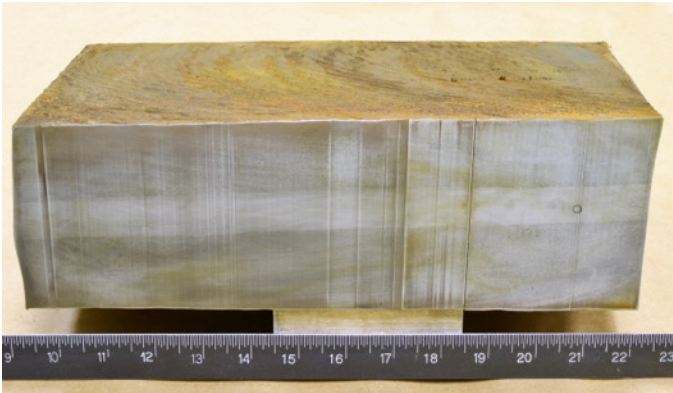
WF-70 Beltline weld revealed after removing the cladding and etching block CF [18].
